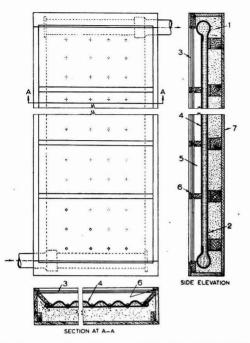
DETAILS OF CONSTRUCTION OF THE SINCLE SOLAR WATER HEATER UNIT [1, rockwool insulation; 2, bottom plane G.I. sheet; 3, glass sheet cover; 4, top G.I. corrugated sheet; 5, air gap; 6, felt padding; and 7, wooden casing]
